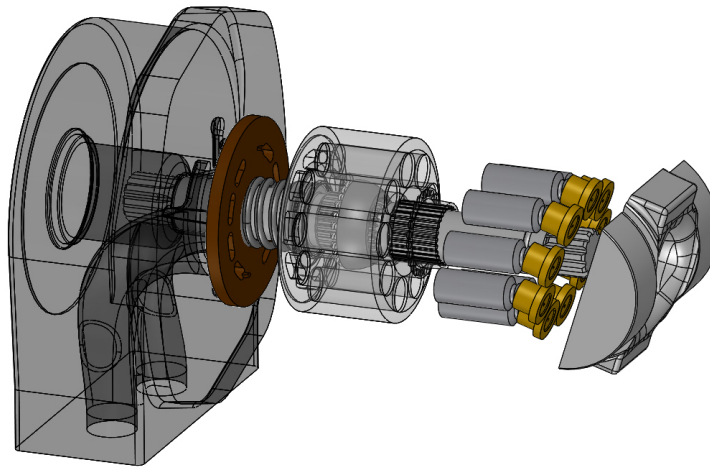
Axial piston machine of swashplate type with main parts separated
